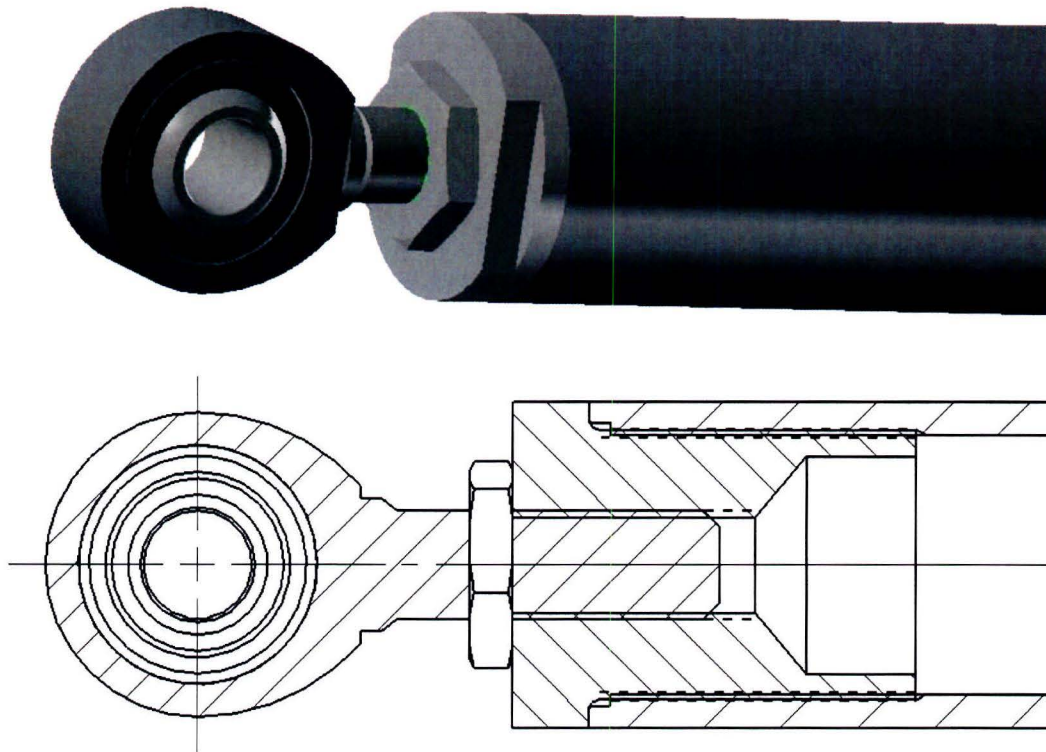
One end of a rod assembly in 3D and cross section
